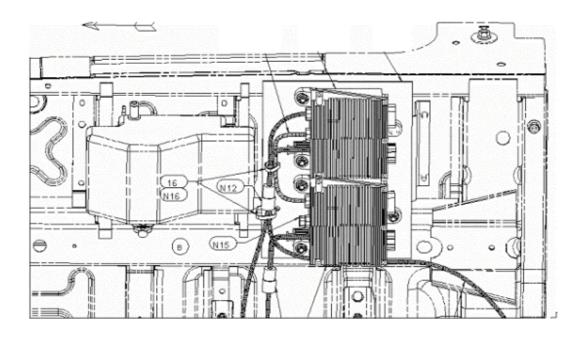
Mounted Under Driver Side Of Cab for 7000 Models
